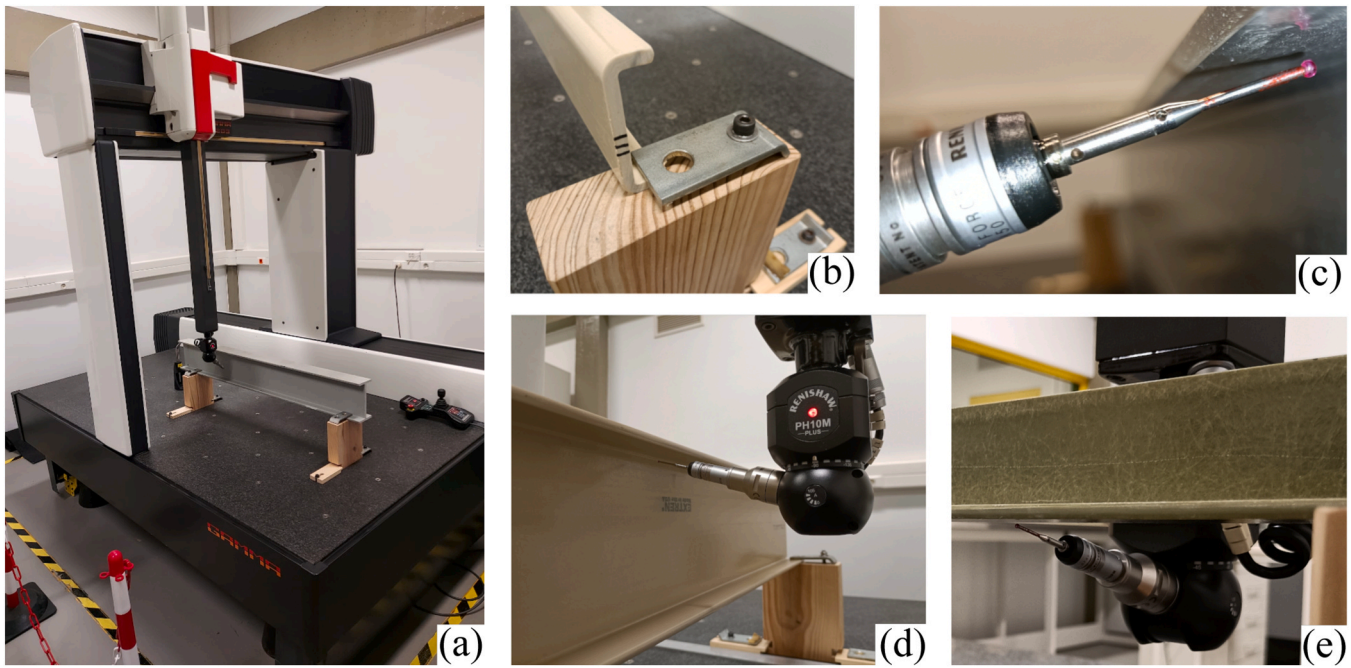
Automatic DEA GAMMA 2203 3D CMM: (a) moving bridge, (b) boundary condition of a C-section profile, (c) detail of the stylus system in the measurement of an I-section, (d) detail of measurements under a C-section flange, and (e) under an angle section.
